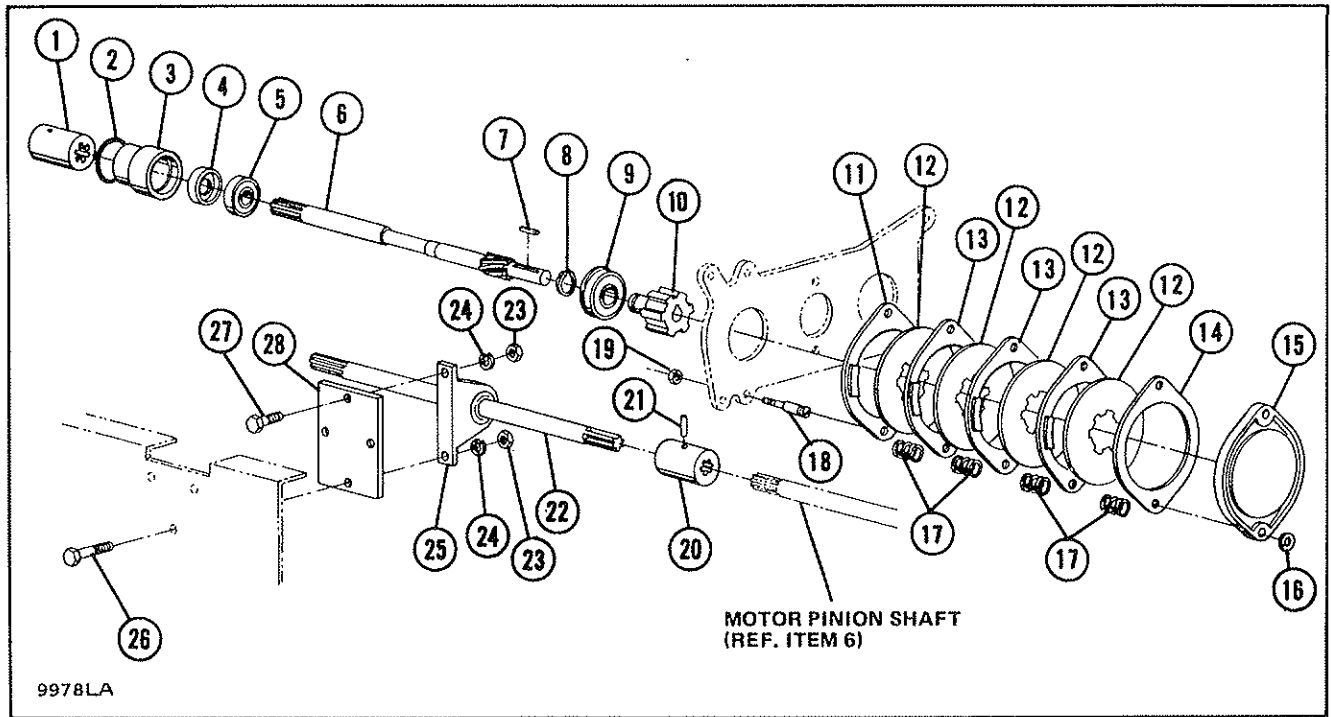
Motor Pinion Shaft, Coupling and Motor Brake Parts.
